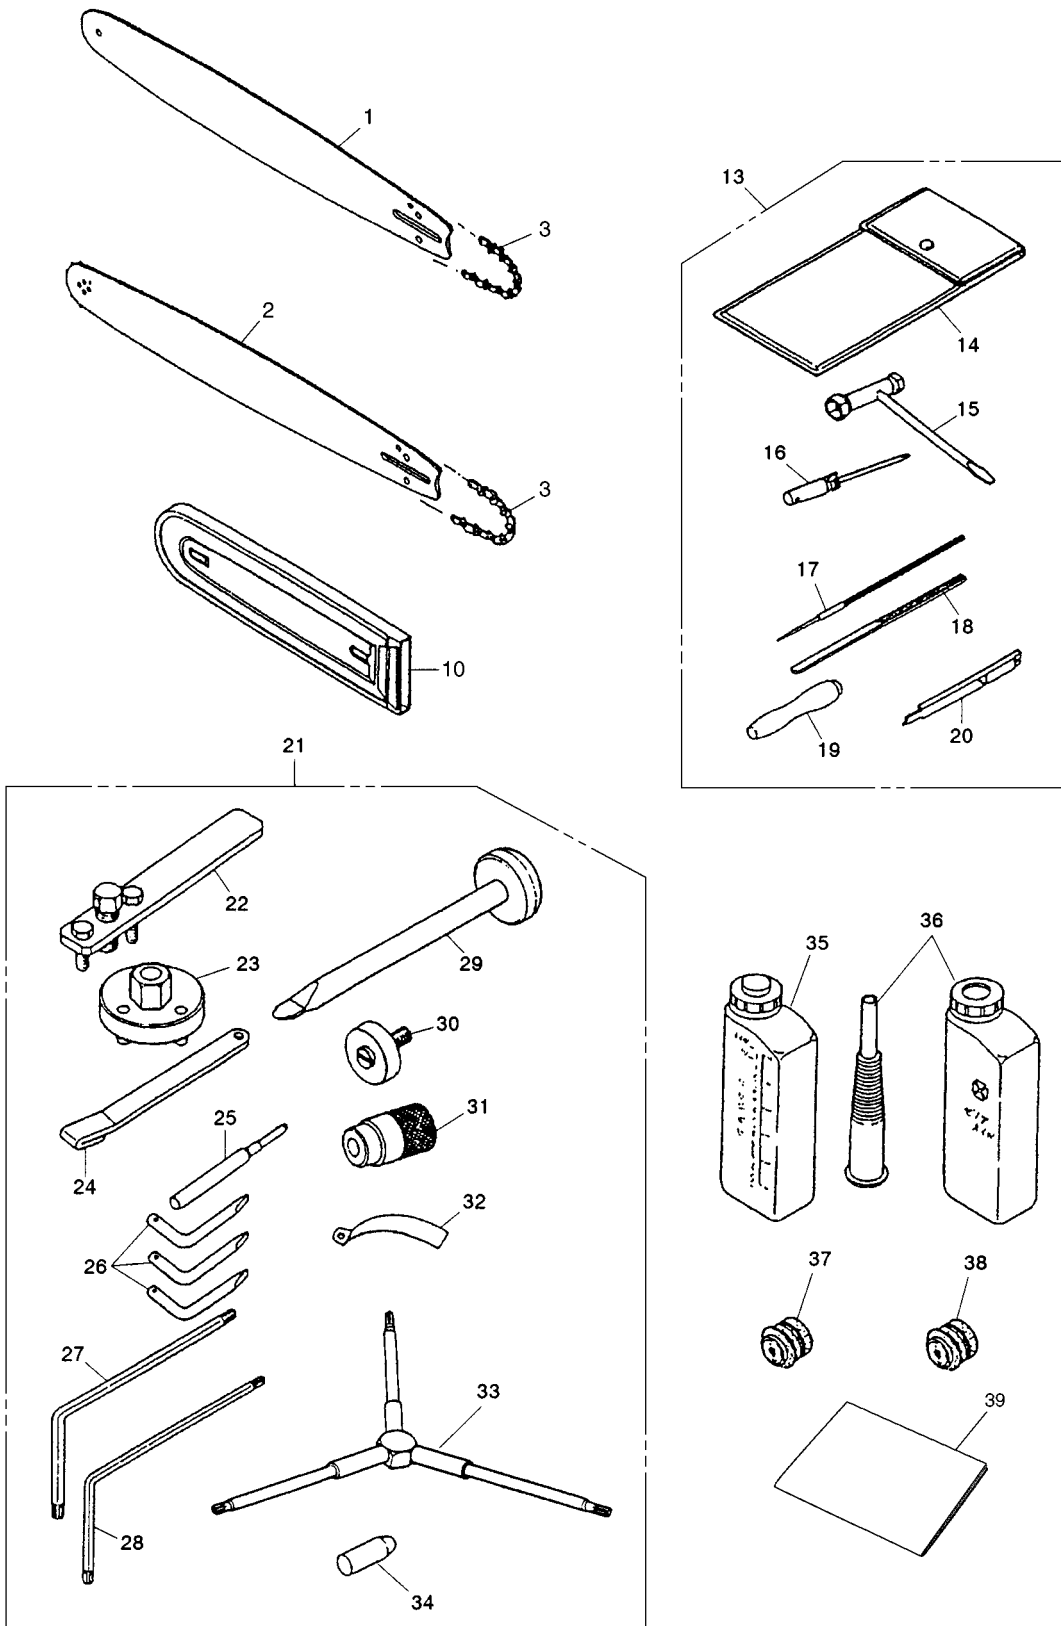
GUIDE BAR, SAW CHAIN, TOOLS
